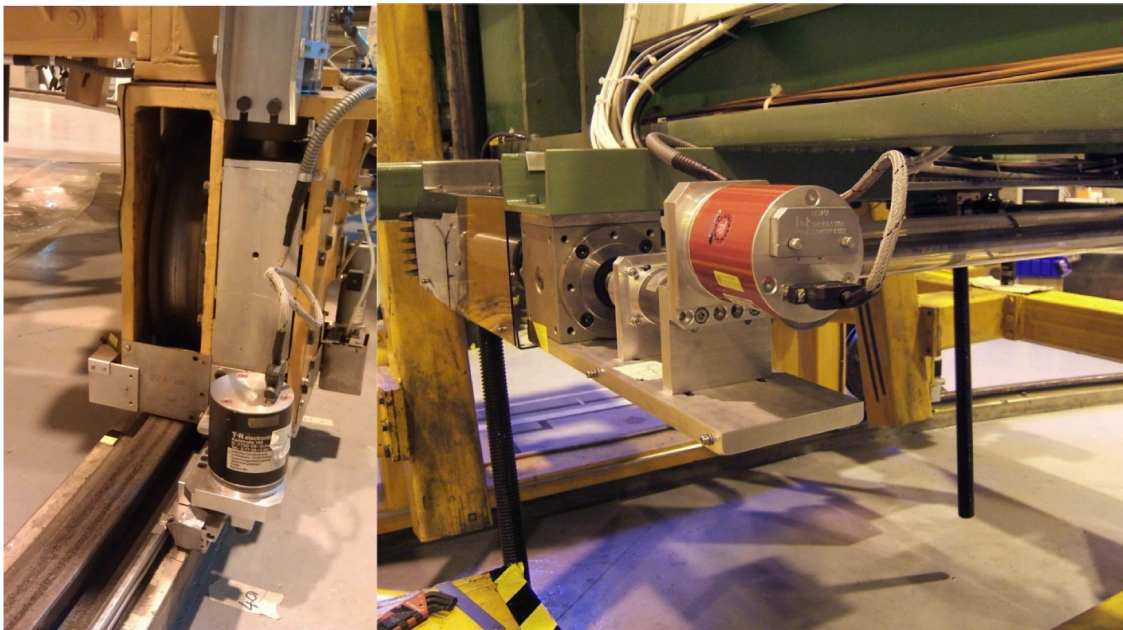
Driving mechanisms: Left – horizontal motor encoder and a driving wheel;
